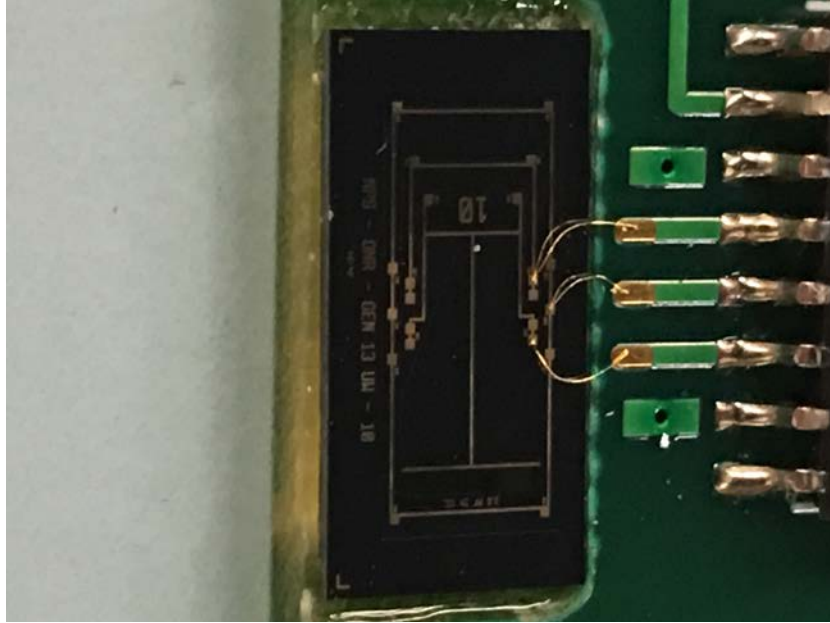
Close-up of Underwater Sensor Mounted to PCB, Detail View of Wire Bonding.
